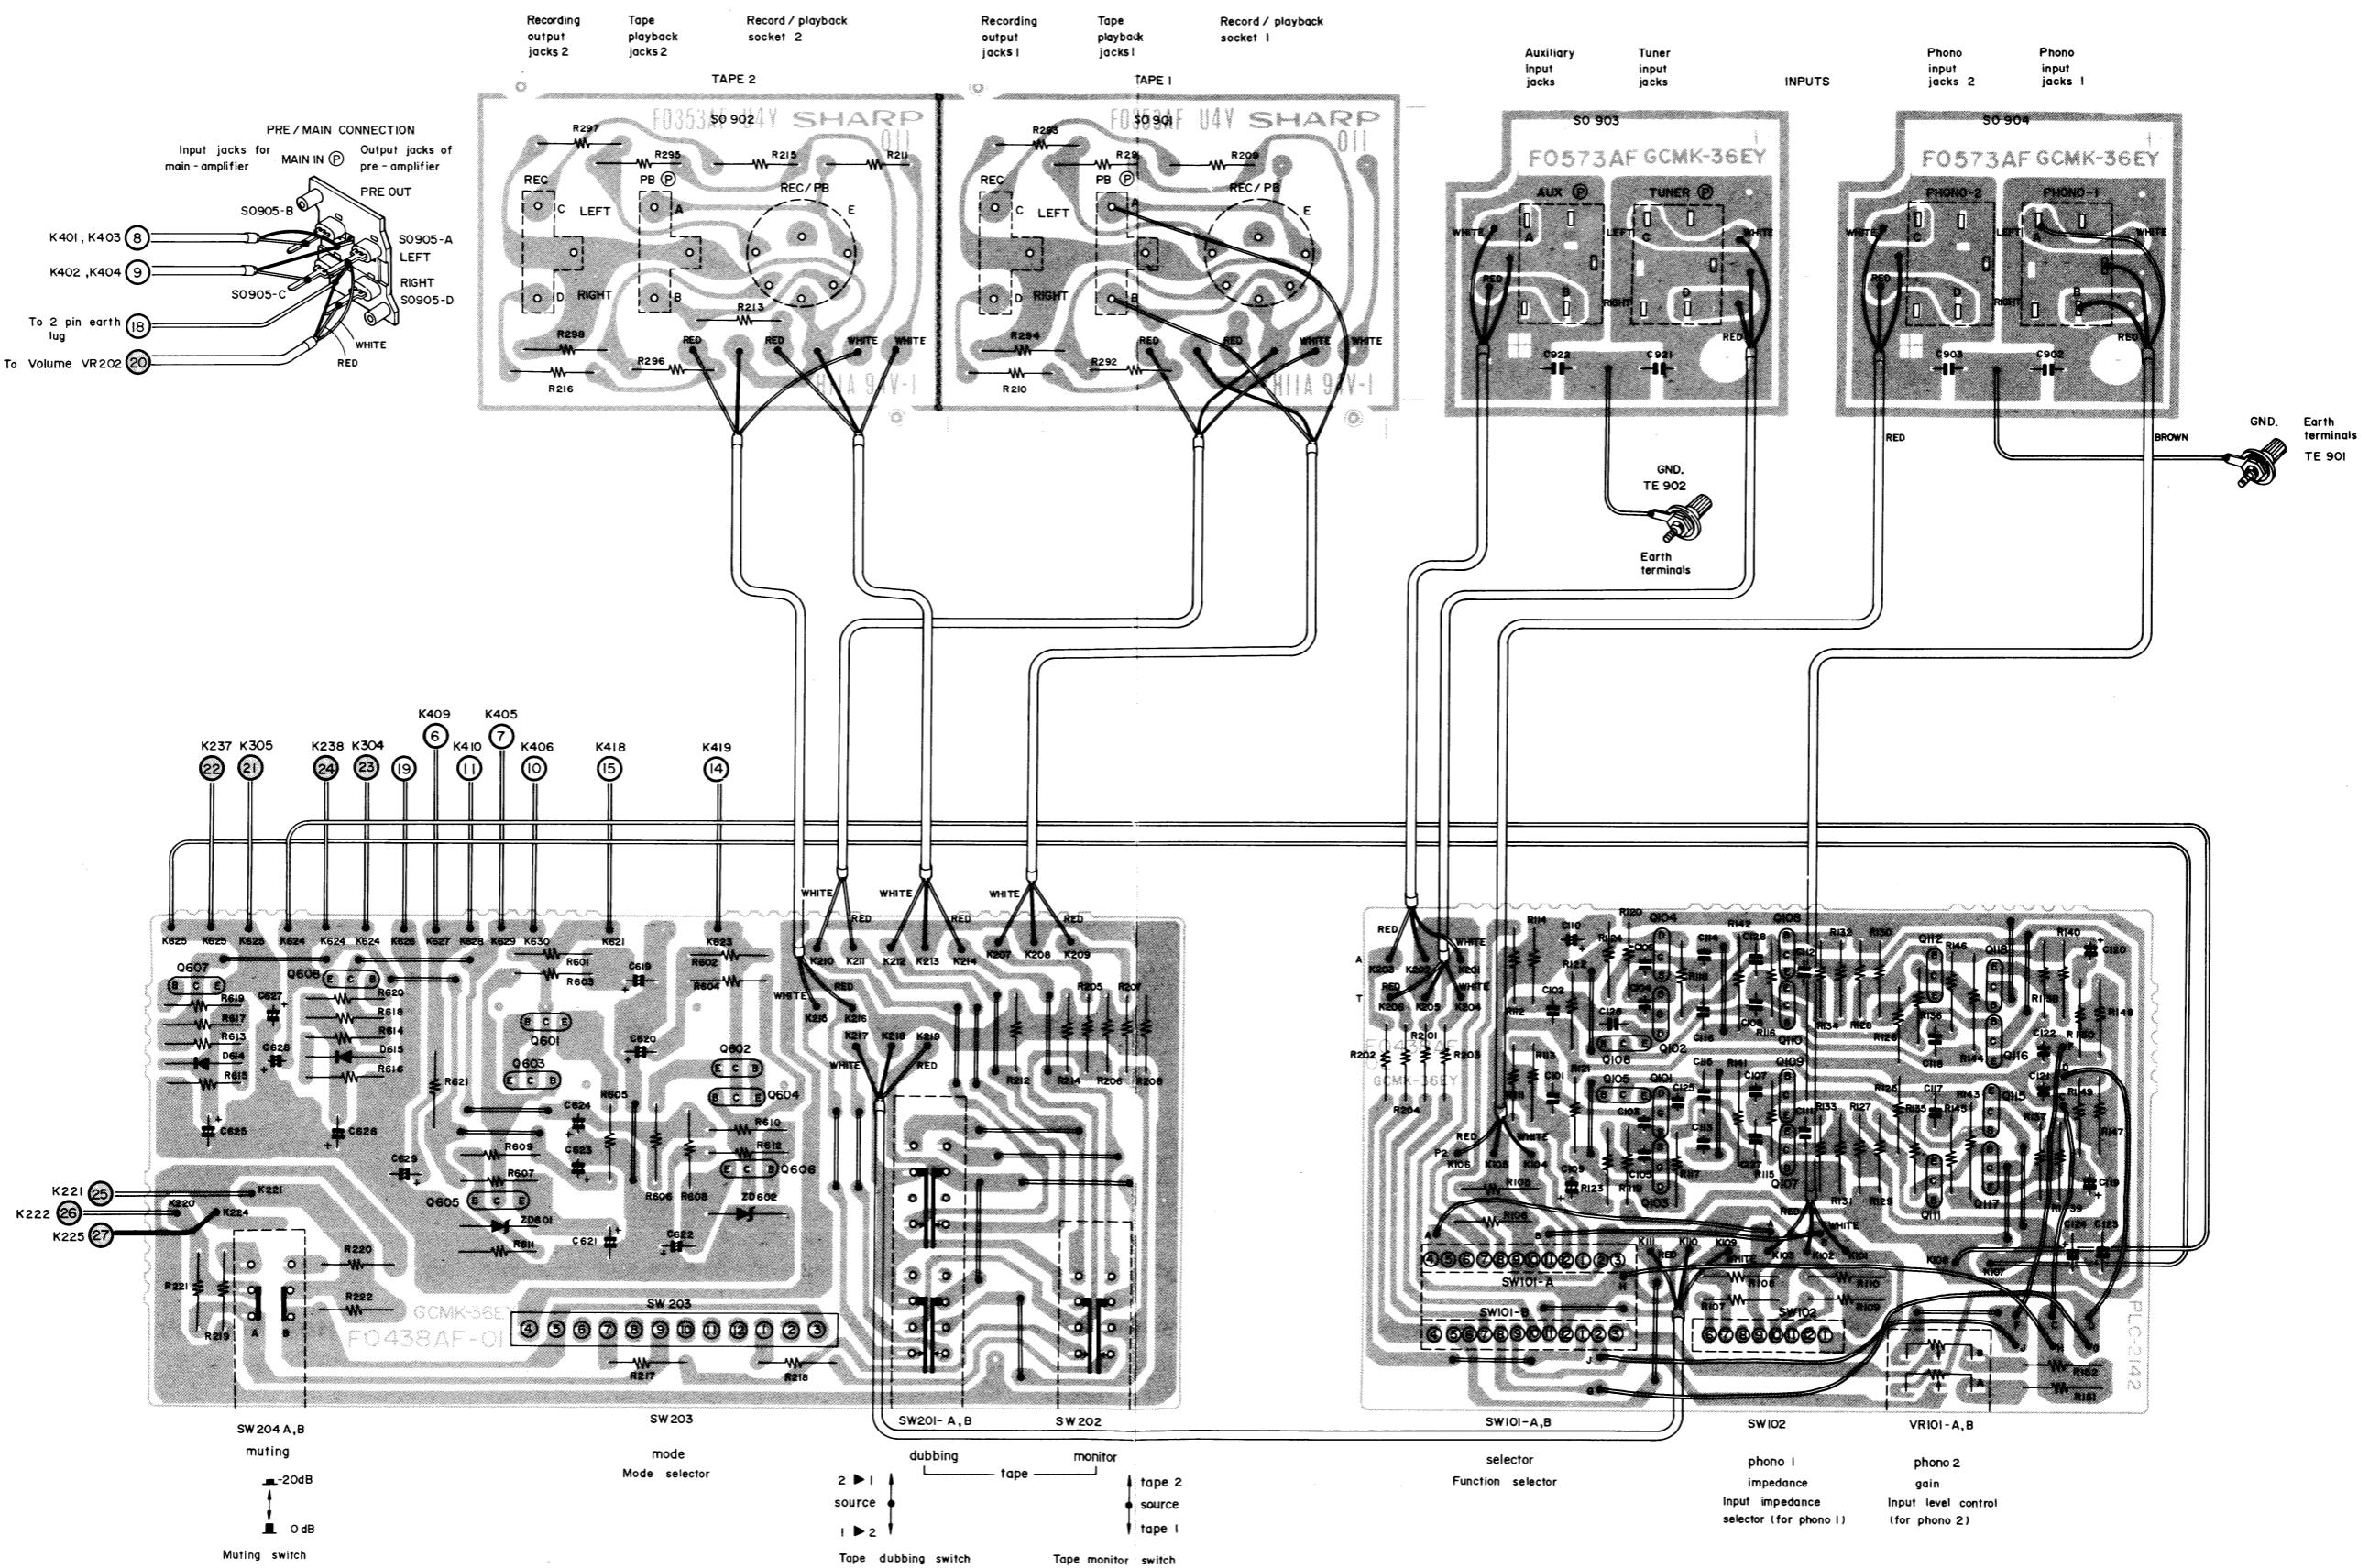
WIRING SIDE OF MAIN AMP. PRINTED WIRING BOARD
